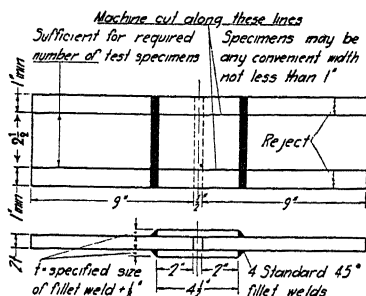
Transverse fillet-weld shearing specimen L-2.
